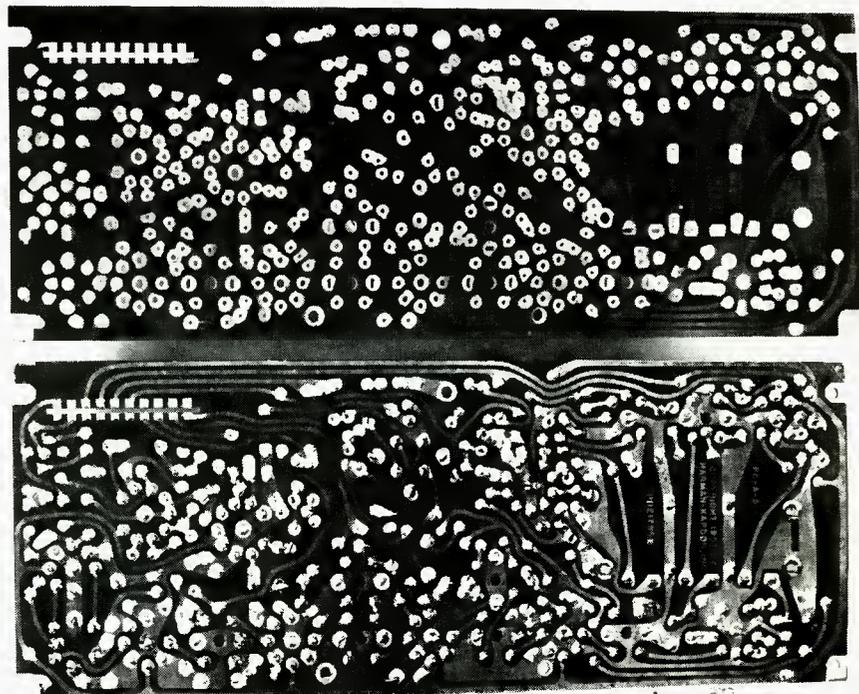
Printed board with solder mask is shown at top before insertion of components; same board is shown at bottom after components are dip-soldered in place.
